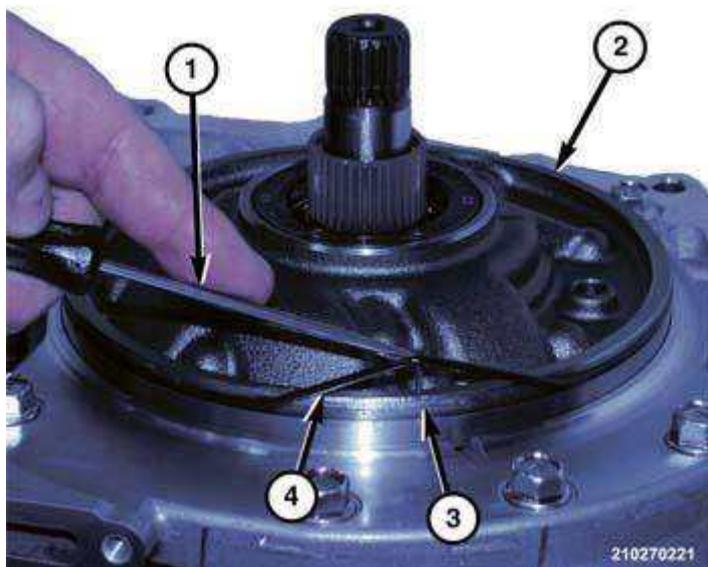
Fluid Pump Housing O-Ring Seal & Hook Tool
